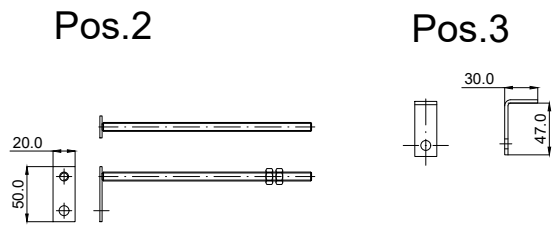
Position 2 & 3 (fixable leg) (Source: Product drawing)
